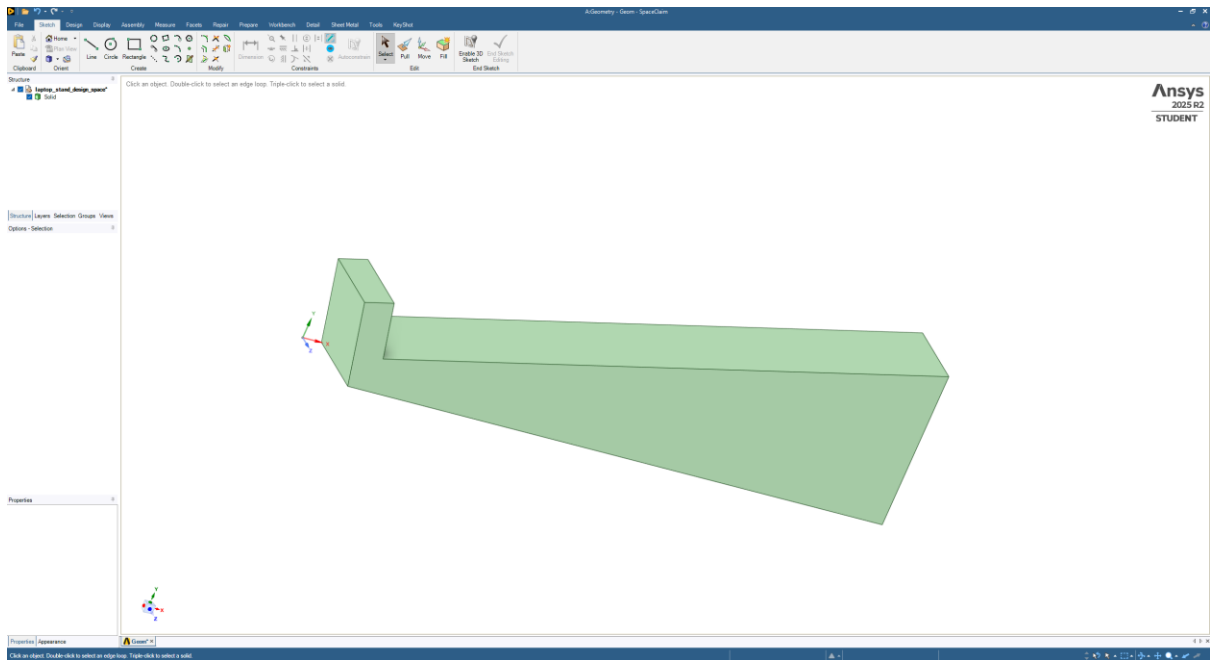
Provided 3D STL Geometry of Dimensional Constraints
